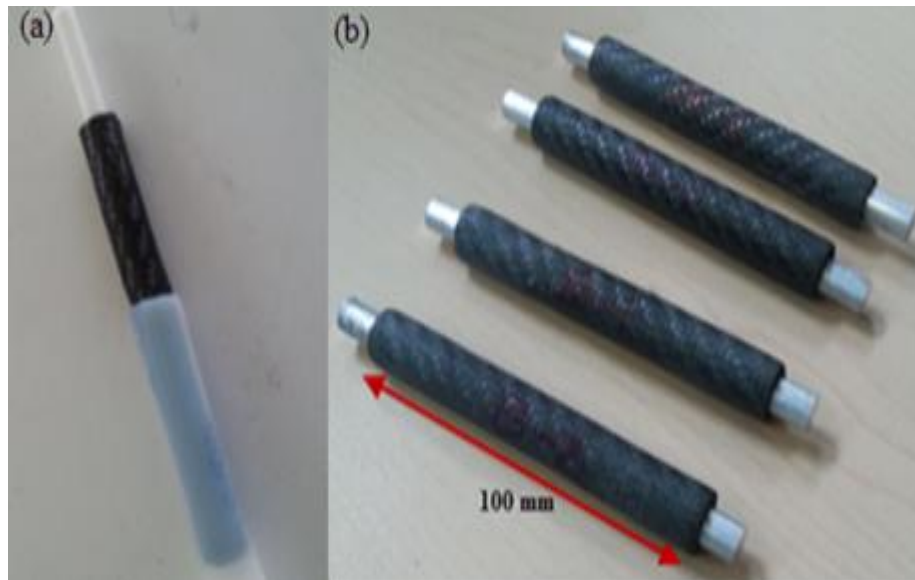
(a) Cylindrical mold, (b) cylindrical hollow structure composite specimens.
